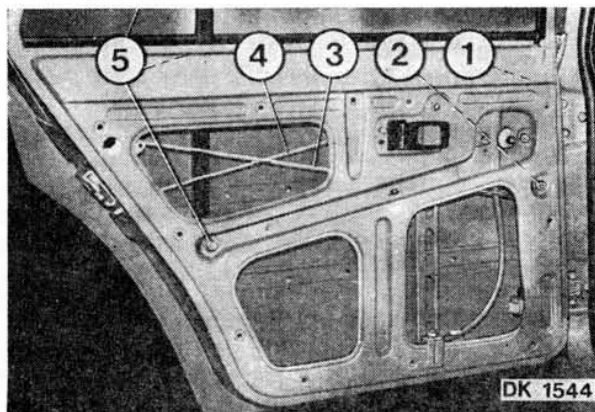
/6 - Front Door Control Linkage and Fastening/Adjusting Screws
